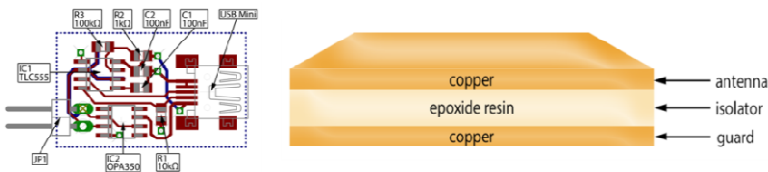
Left: board layout of sensor module. Right: layer model of sensor electrode
